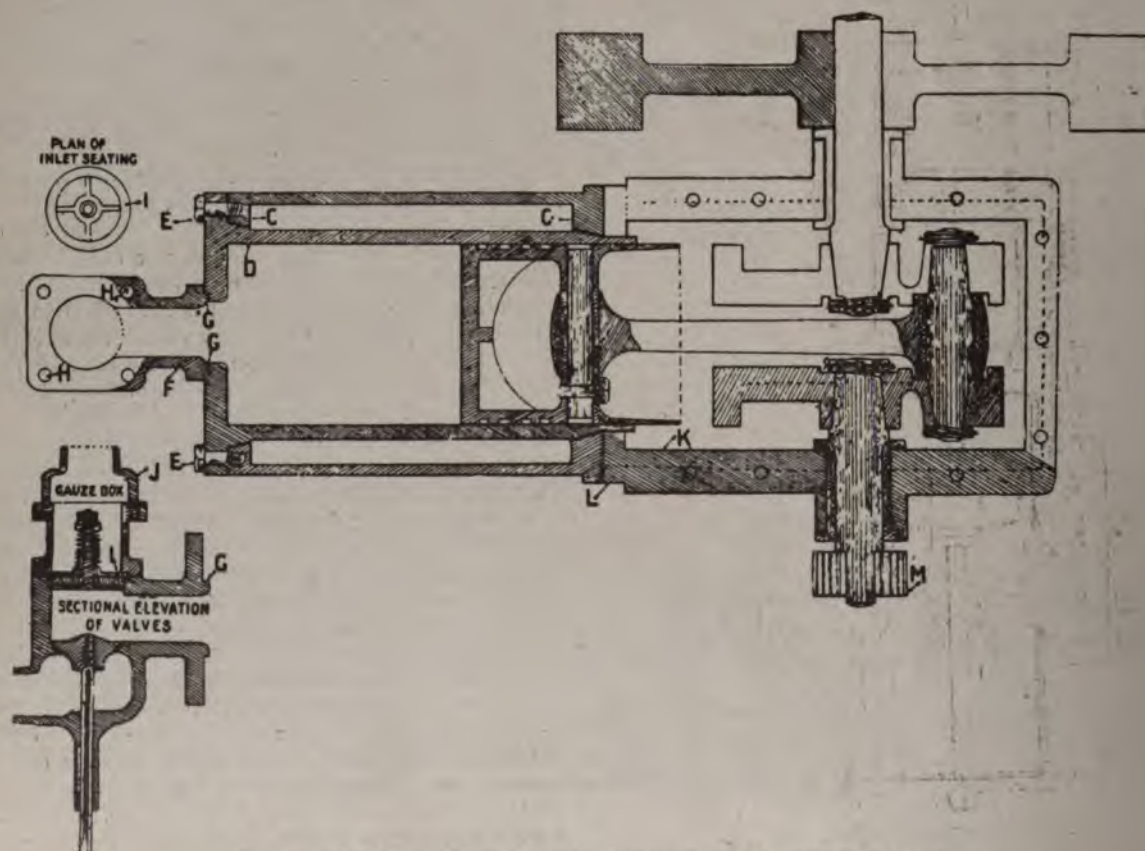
PLAN OF ADAMS MOTOR AND SECTIONAL ELEVATION OF VALVES.
